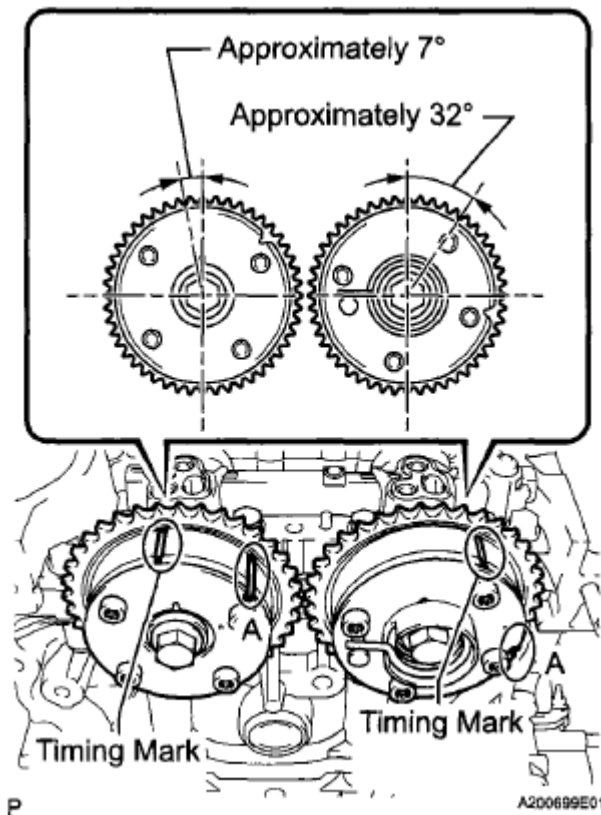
Identifying Timing Marks Of Camshaft Timing Gears
